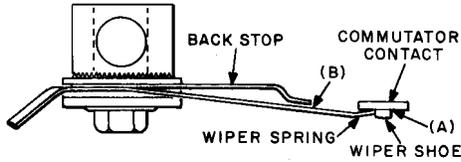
Clearance Between Back Stop and Wiper Spring and Position of Wiper Shoe on Commutator Contact
